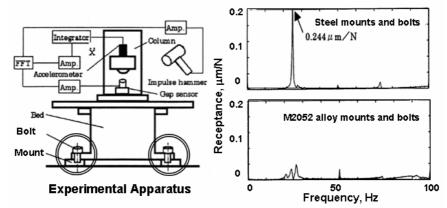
Damping effect of mount and bolt material in a grinding machine.
